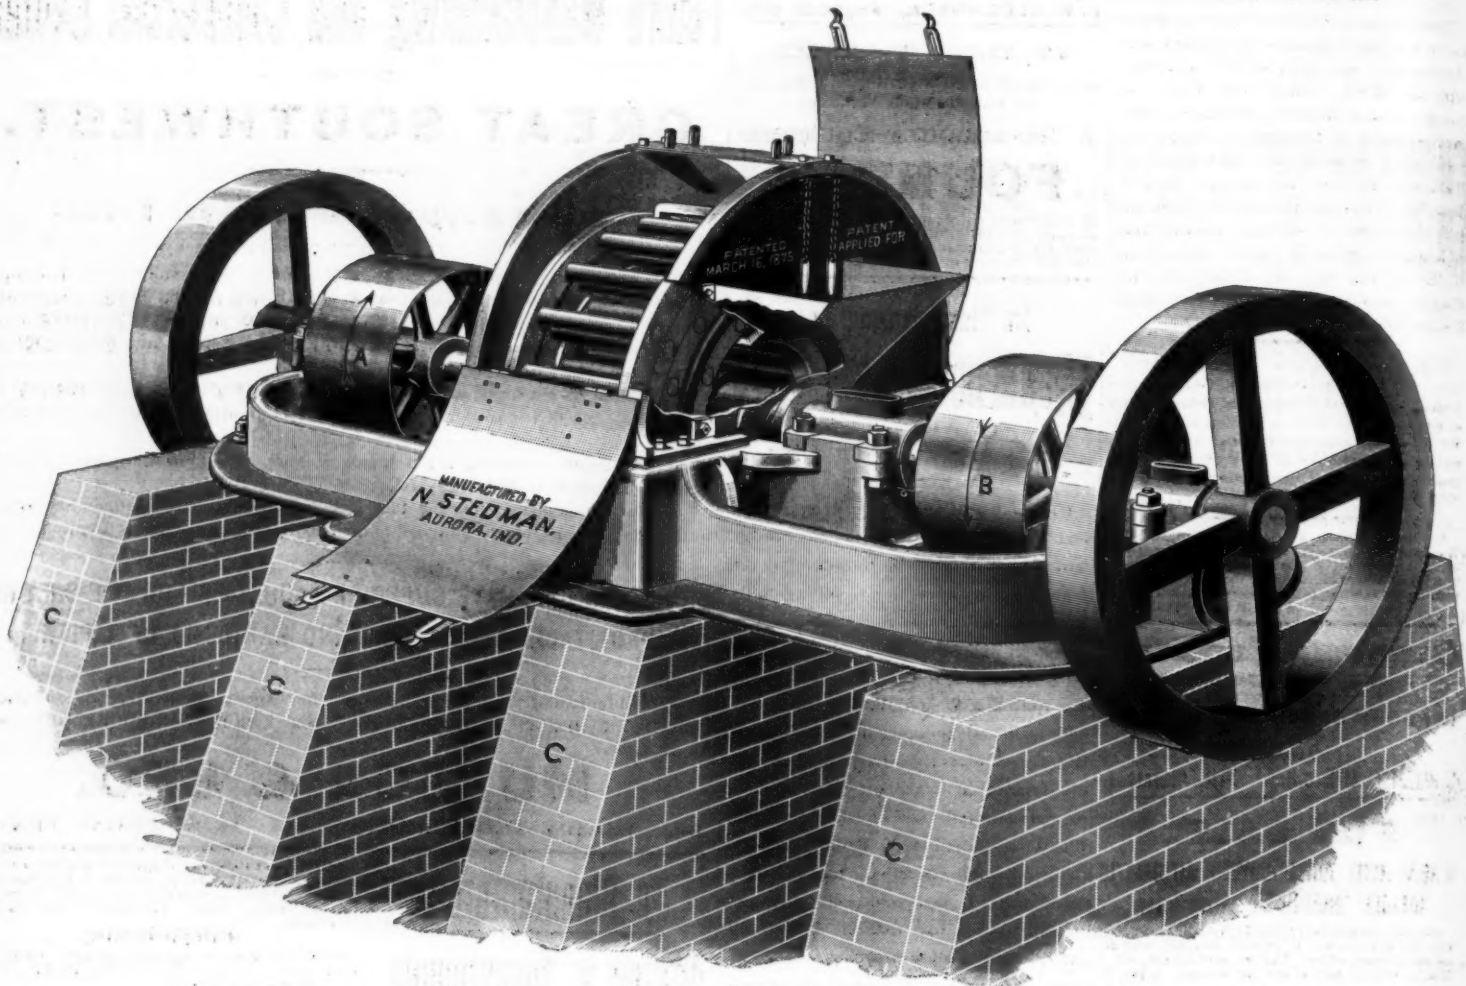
IMPROVED CLAY DISINTEGRATOR.
